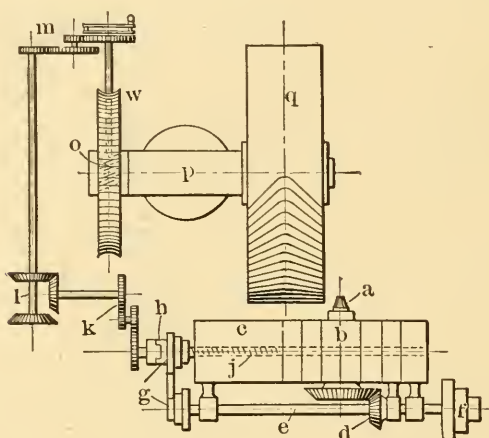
DIAGRAM OF MILLING PROCESS OF CUTTING DOUBLE HELICAL GEARS.
